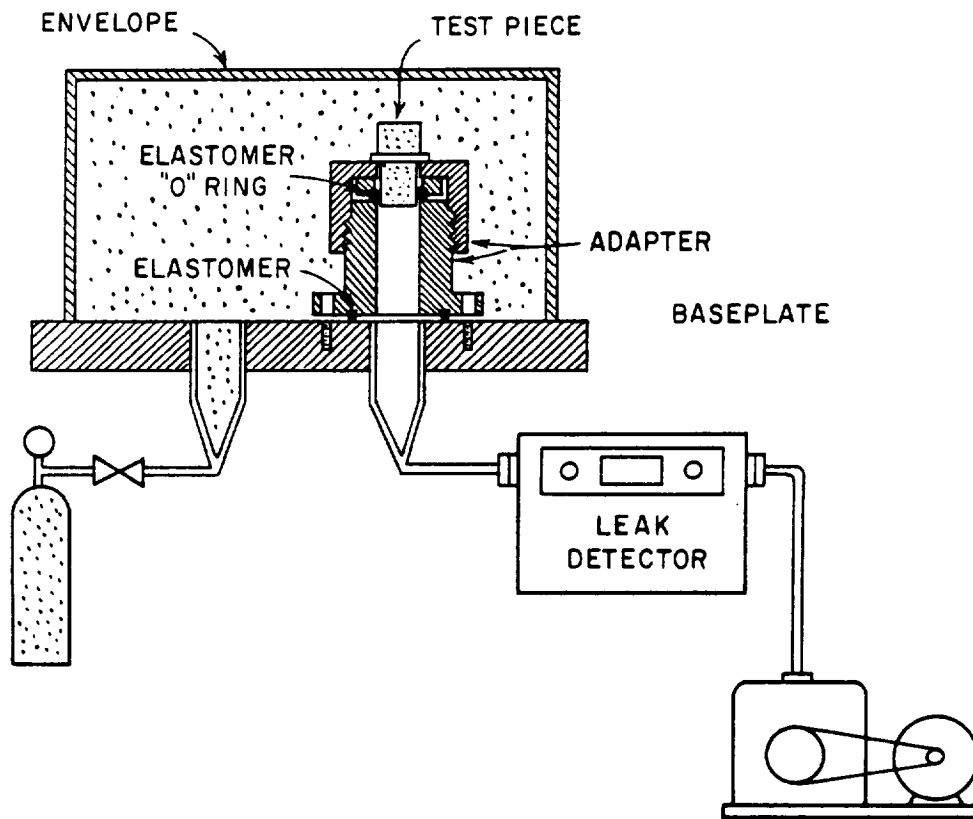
Reliable Test Fixture for Leakage Measurement
